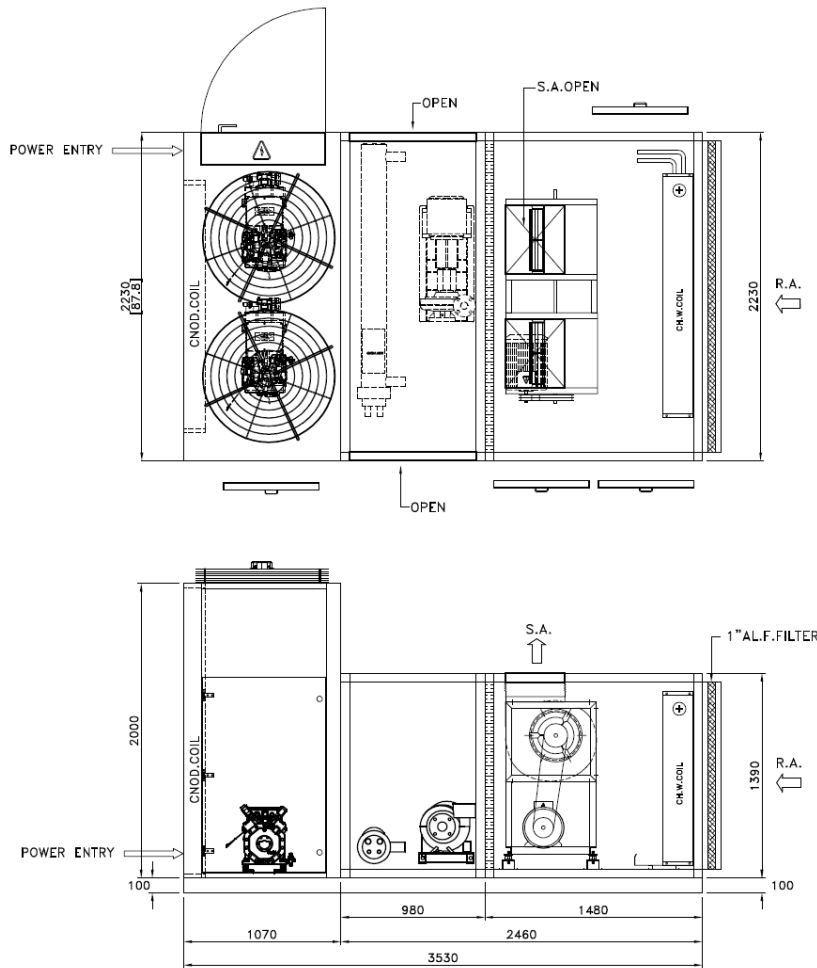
Top and Side Views of 100 kW Prototype Air-Cooled Chiller
